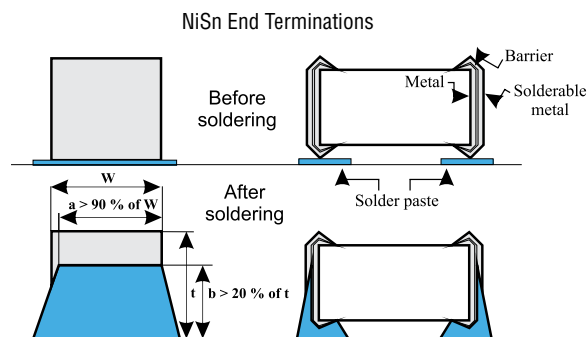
Soldering Criteria for Wave and IR Reflow Pb-containing Soldering
